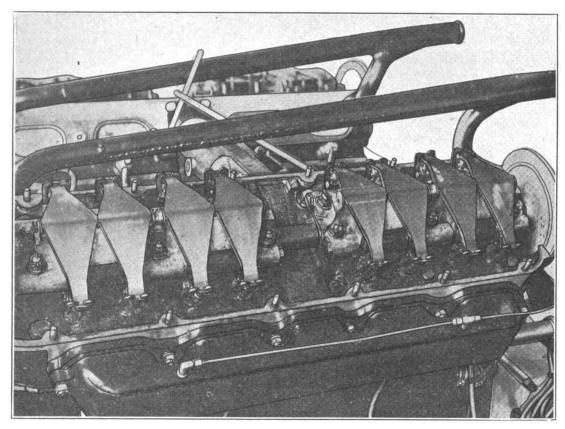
View of head , with cover removed , showing valve gear and flat springs.
